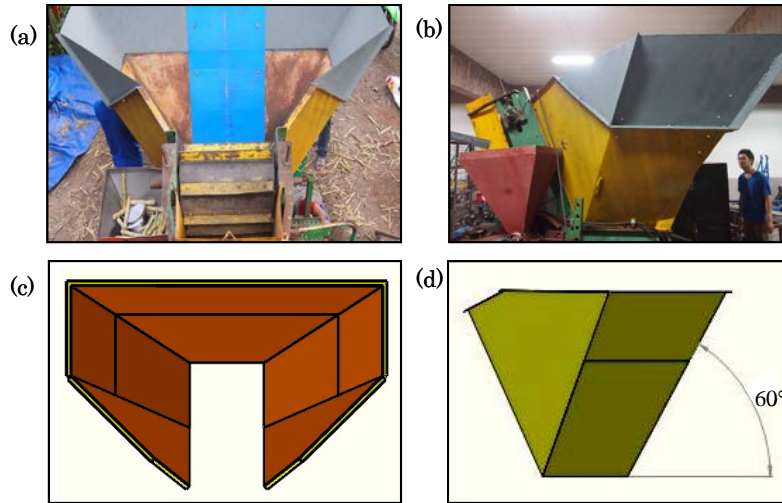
The modified container bin: photo top view (a), photo side view (b), drawing top view (c) and drawing side view (d)
